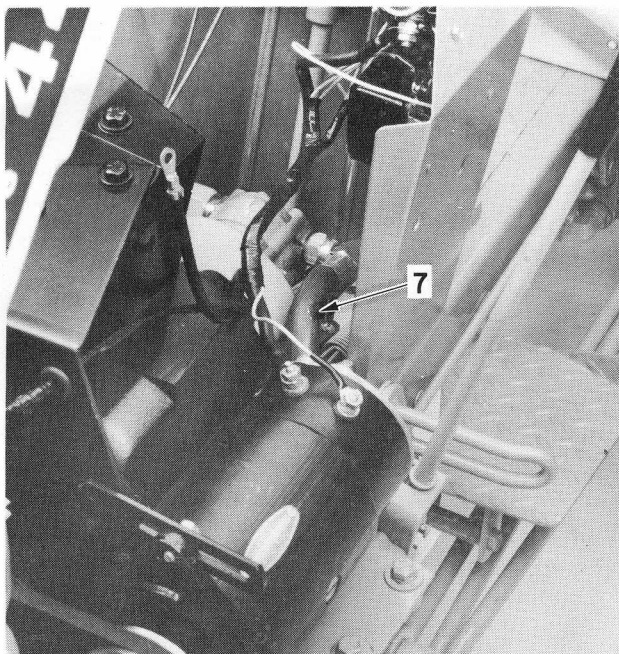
Installing the Hose Between PTO Valve and Tractor Pump
